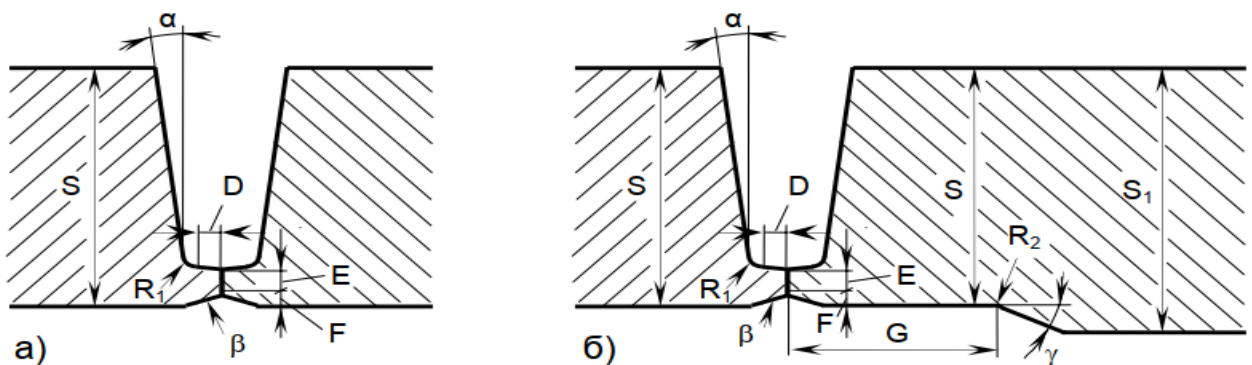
Geometric parameters of edge cutting and pipe joint assembly for Saturnax welding: *a* - connection of pipes with the same wall thickness; *b* - connection of pipes with different wall thickness
